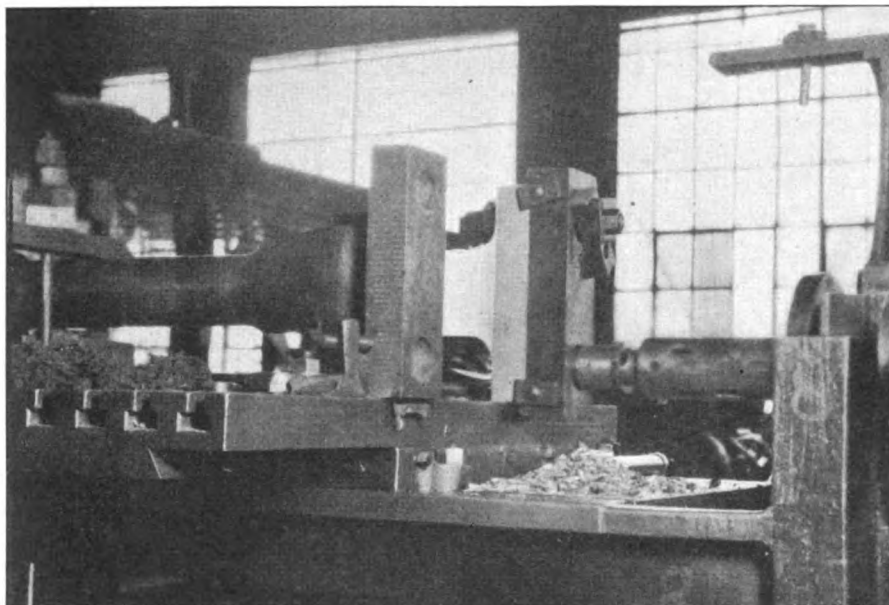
BORING THE HOLES IN CONNECTING ROD ENDS ON A HORIZONTAL BORING MACHINE
